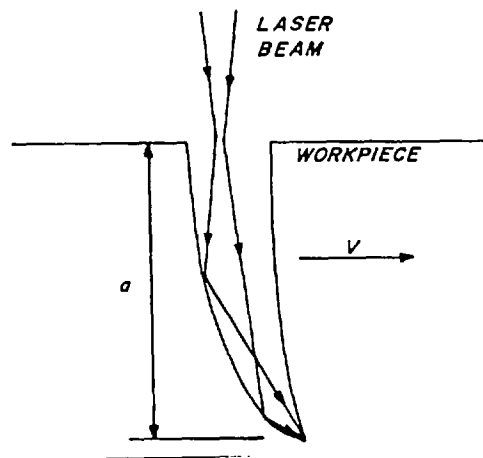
Shape of "keyhole" during laser welding of quartz (Ref. 159)
